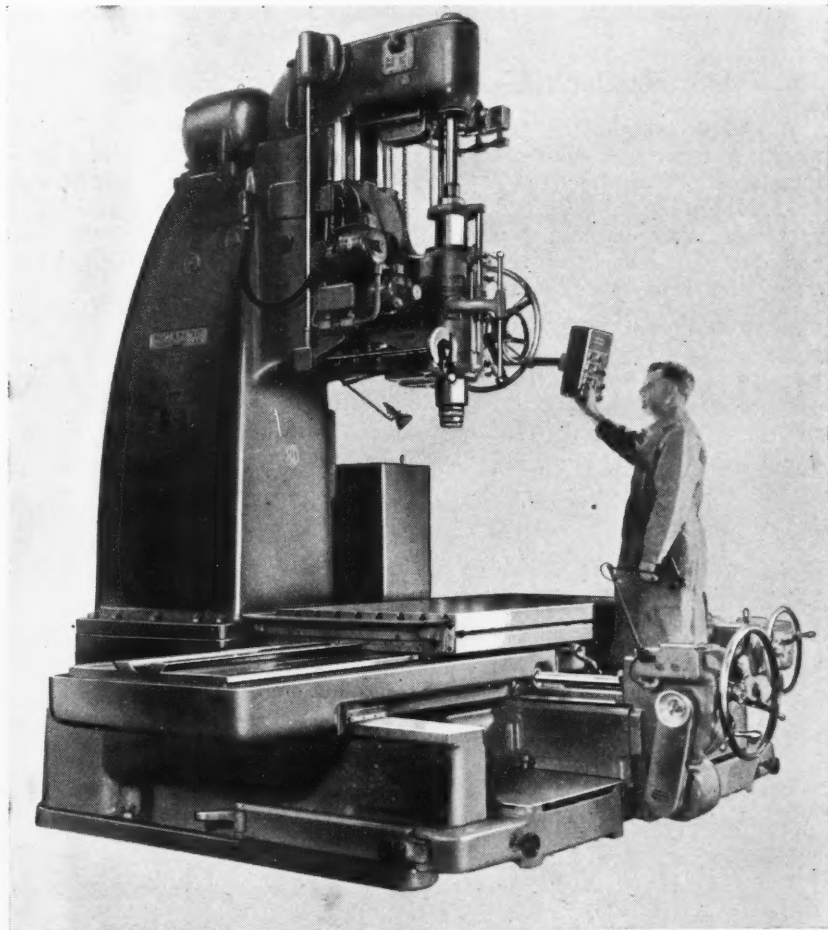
Giant size jig boring machine of open-side construction recently announced by Pratt & Whitney
